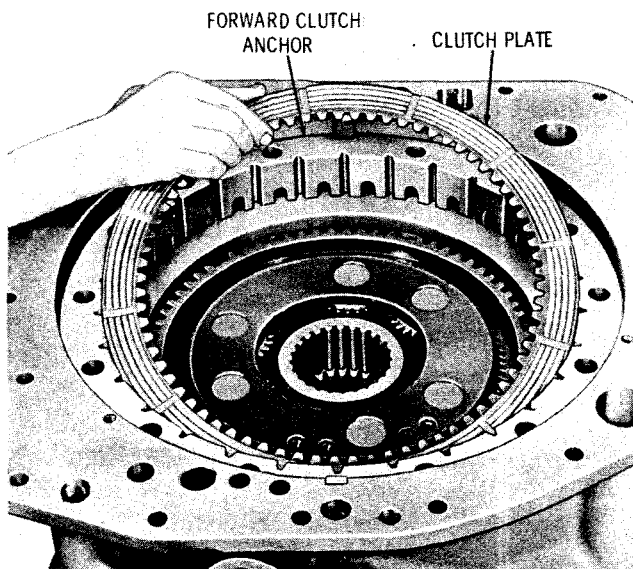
Installing forward clutch plate before installation of ring gear (5630 models)
